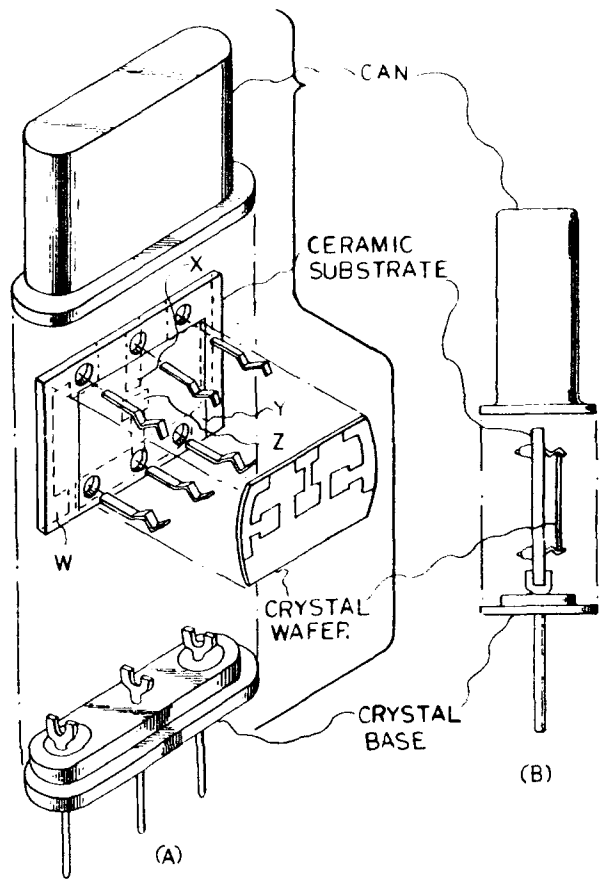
A) Exploded view of crystal wafer-ceramic substrate-leads-base-cover assembly, B) side view of wafer-substrate-base assembly with cover.
